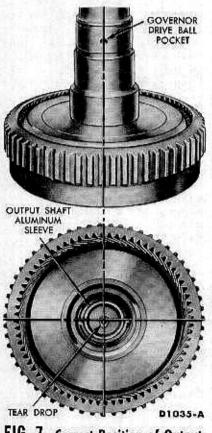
Correct Position of Output Shaft Aluminum Sleeve
